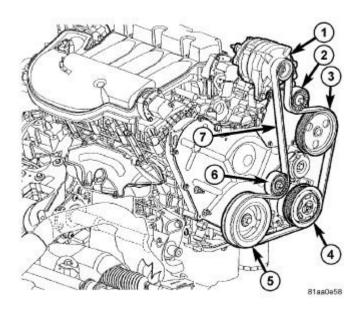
Identifying Accessory Drive Belt & Pulleys Courtesy of CHRYSLER LLC
